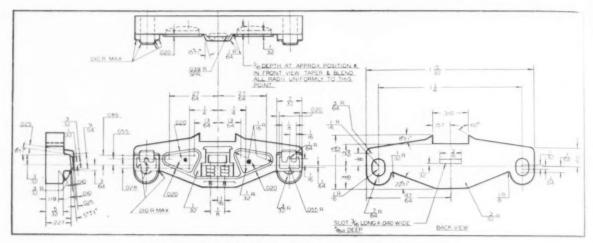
Detail drawing of truck side being produced in Fig. 5.
